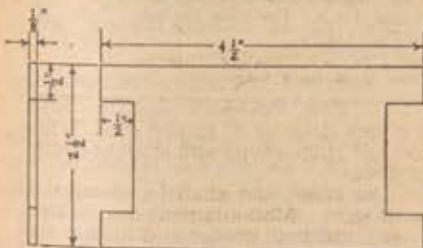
Winder. Material: Packing; fiber, hard sheet, Specification HH-P-91; dimensions in inches: Unless otherwise specified, tolerances: Fractions plus or minus 1/32 inch.
